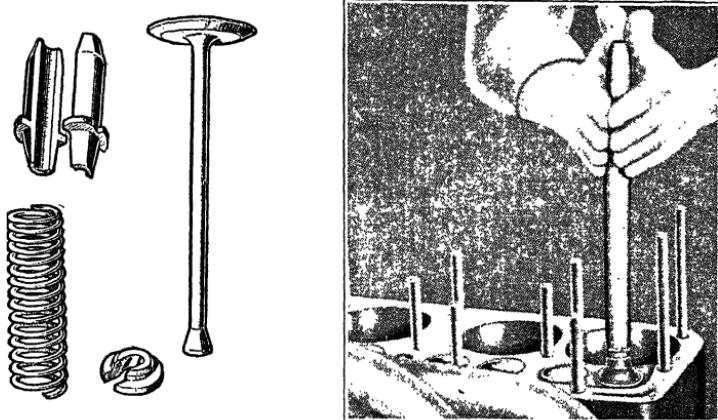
Left —Ford Model "A" Valve, Valve Guide, Spring, and "Horseshoe" Right—Grinding Ford Model "A" Valves or other Valves not Provided with Valve Tool Grips
